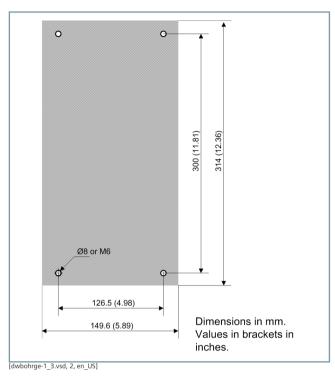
/23 Drilling Pattern of a 1/3 Surface-Mounted Device – 1st Device Row
